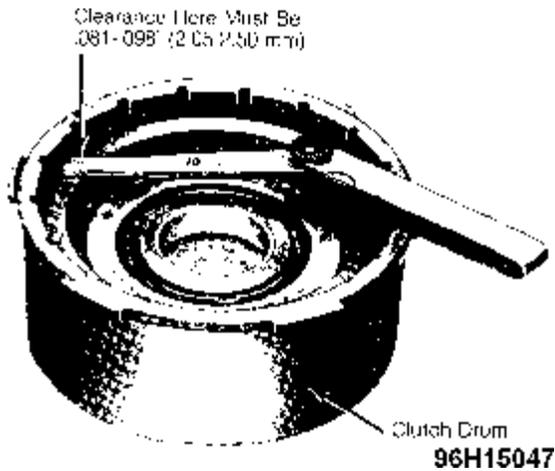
Measuring Direct-Reverse Clutch Clearance
